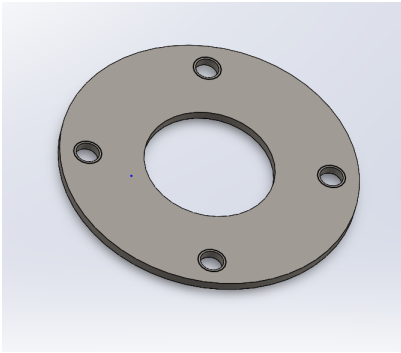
Flange that connects to the motor in revolute joint 1 and 2
